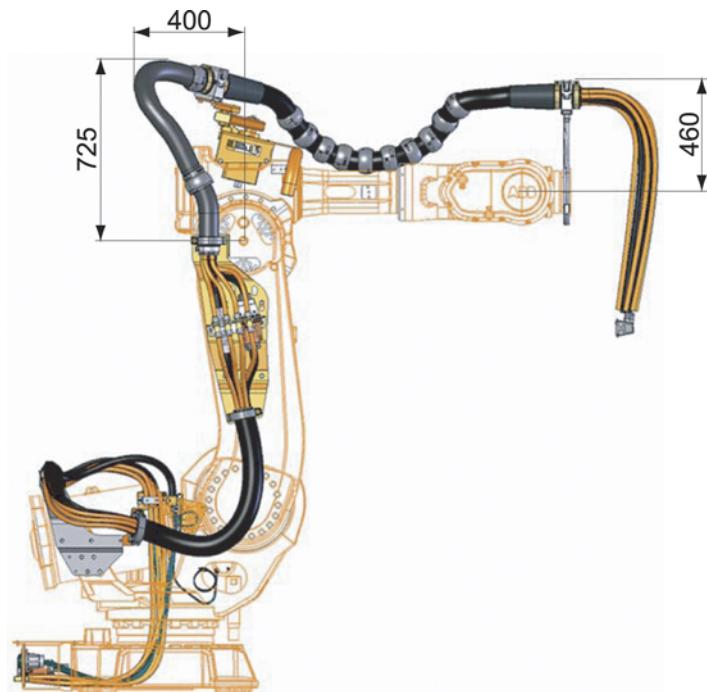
External with retract arm, 798-2 and 781-1 (Dimensions in mm).
